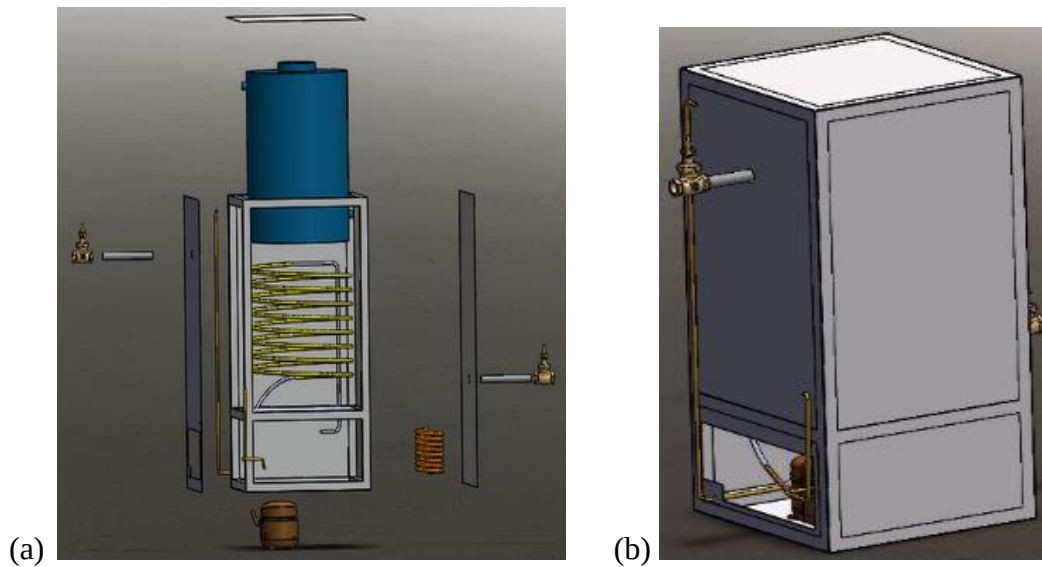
3D view of water cooler (a) before assembly (b) after assembly
